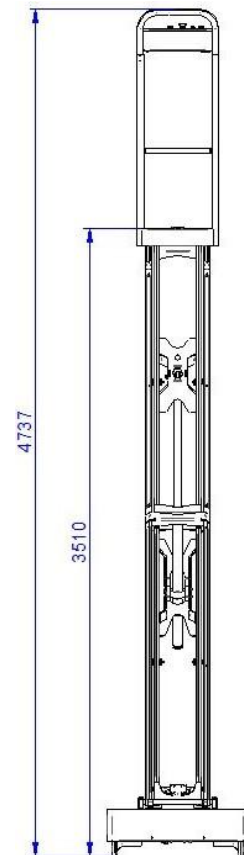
; Maximum height dimensions in mm, 2 scissors
